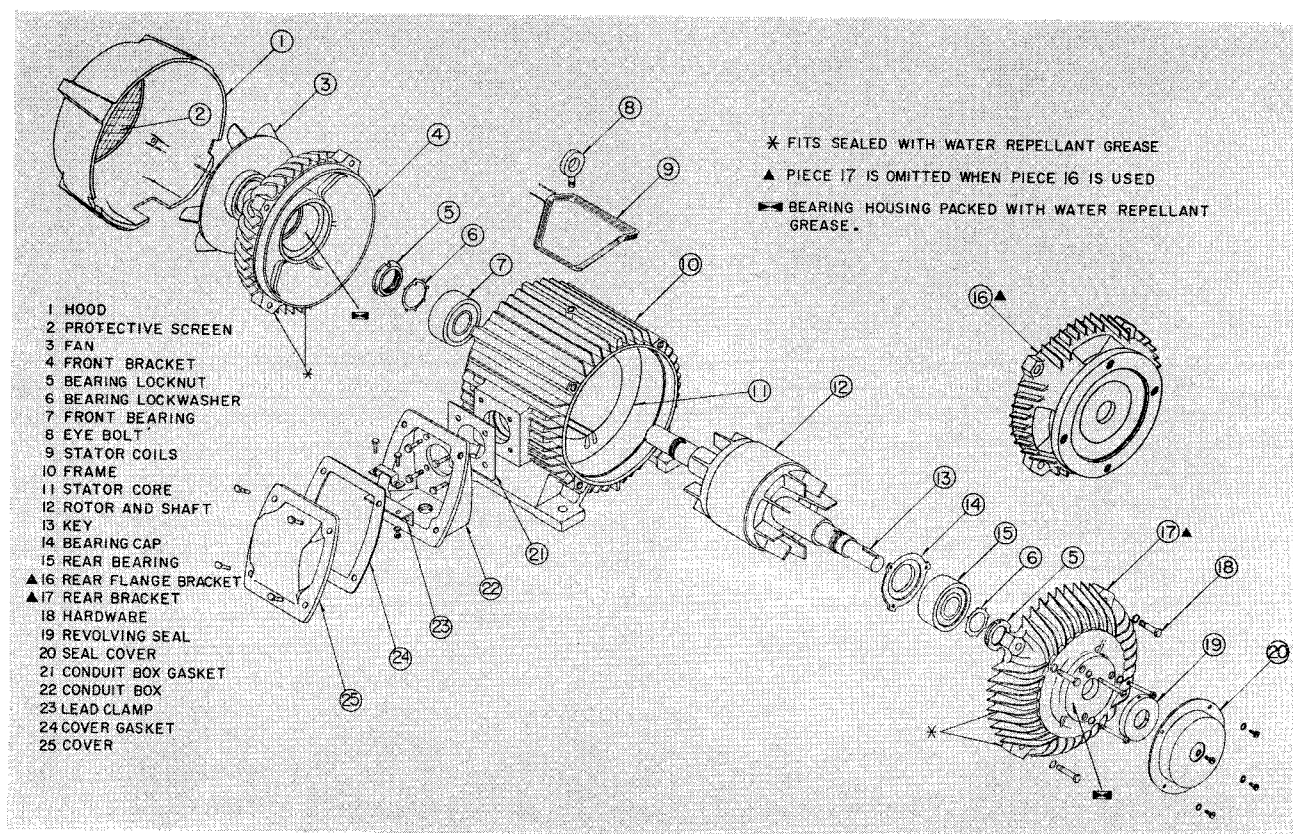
Arrangement of Parts*—Totally Enclosed Fan-Cooled Motors
